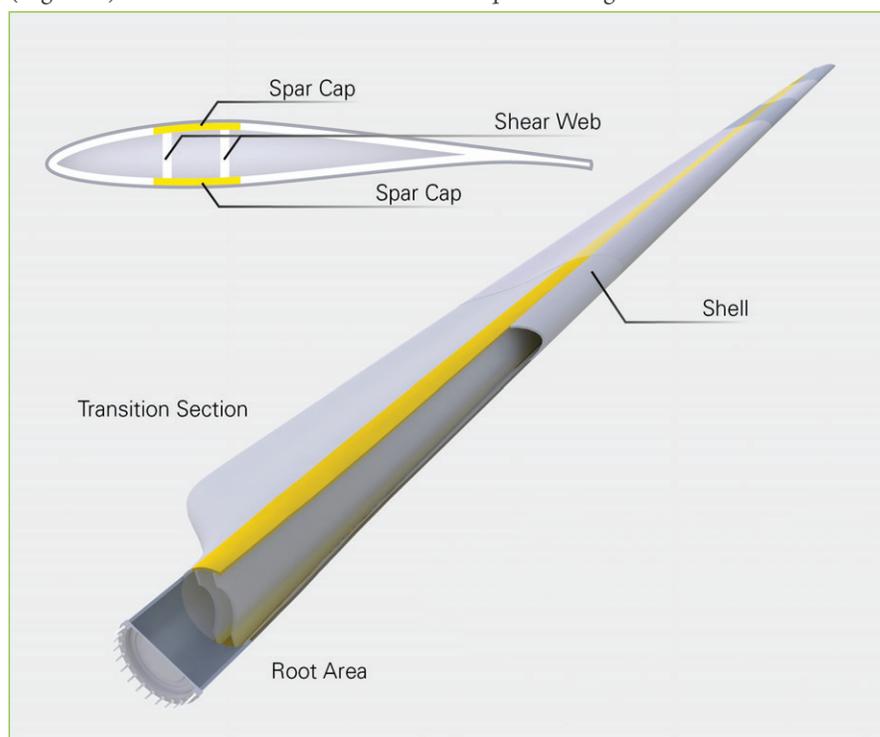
Parts of a wind turbine rotor blade, carbon fibre spar cap made with Saertex[®]
